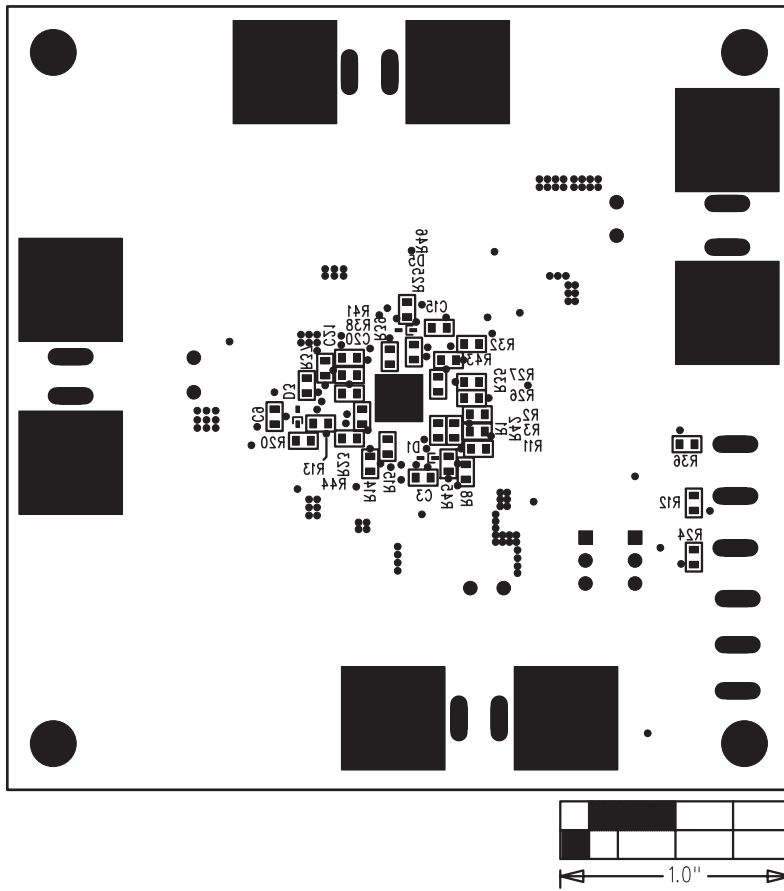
MAX15003 EV Kit Component Placement Guide—Solder Side
